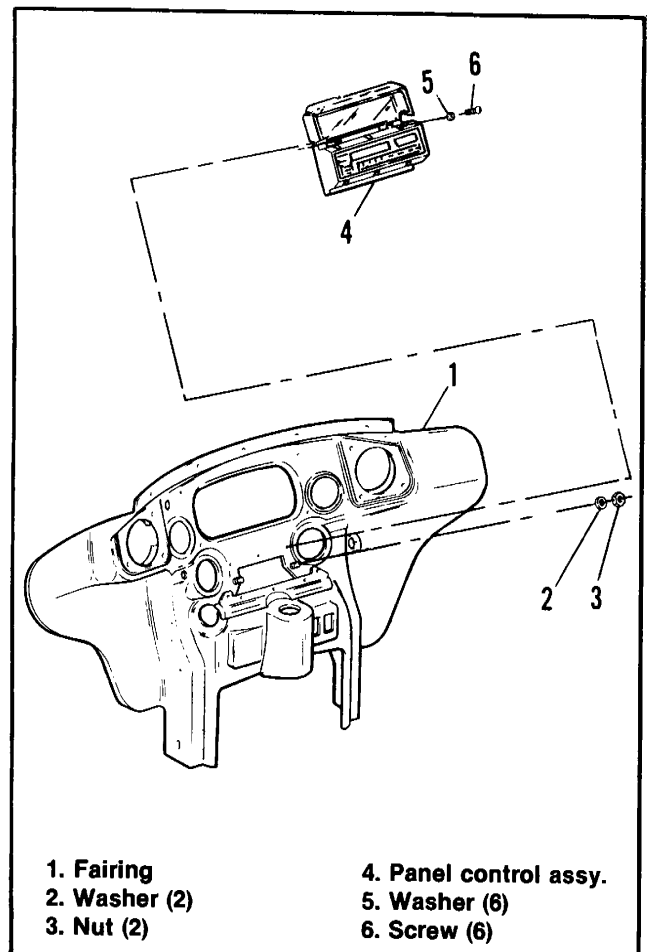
Front Radio Mounting — 1986-1987 FLHTC
